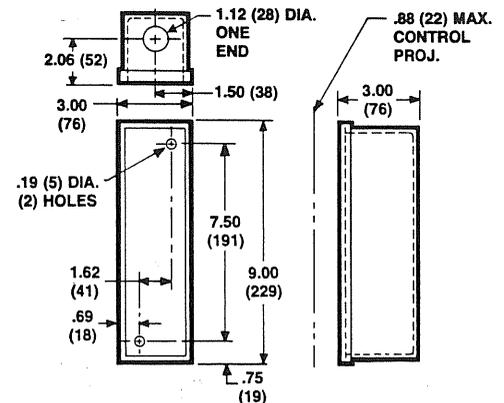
REMOTE CONTROL STATION DIMENSIONS
